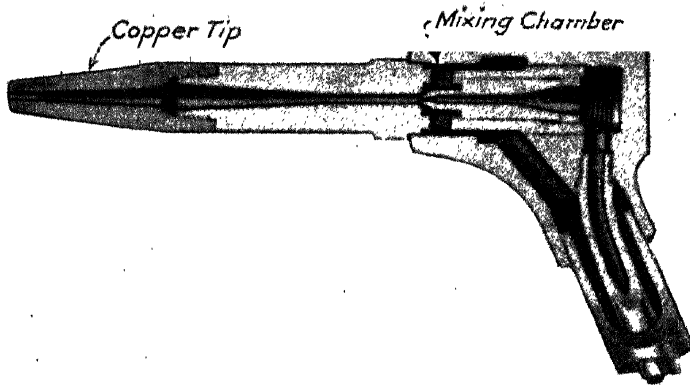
Cross-section of blowpipe head. Oxweld welding nozzle. (Oxweld Acetylene Co., Long Island City, N. Y.)
